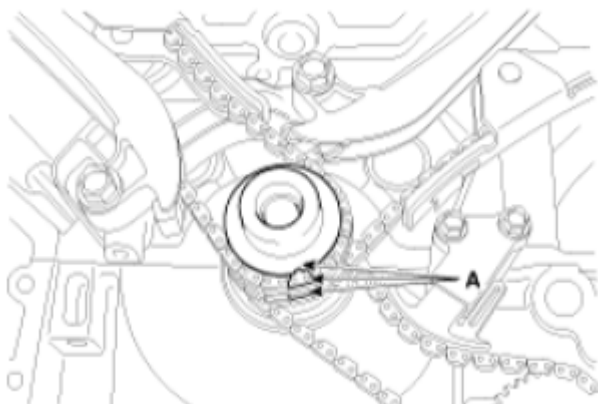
Identifying Timing Mark Of Friction Plate And Crankshaft Sprocket
